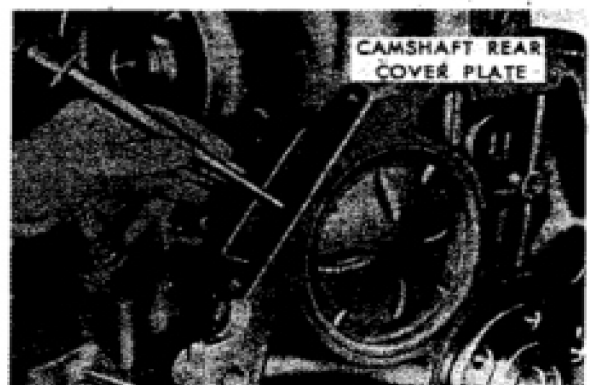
Camshaft rear cover plate can be removed with a punch after removing flywheel, rear engine plate and hydraulic pump.
